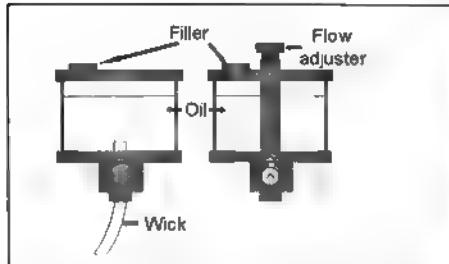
Left, a wick lubricator; right, a drip-feed lubricator.
